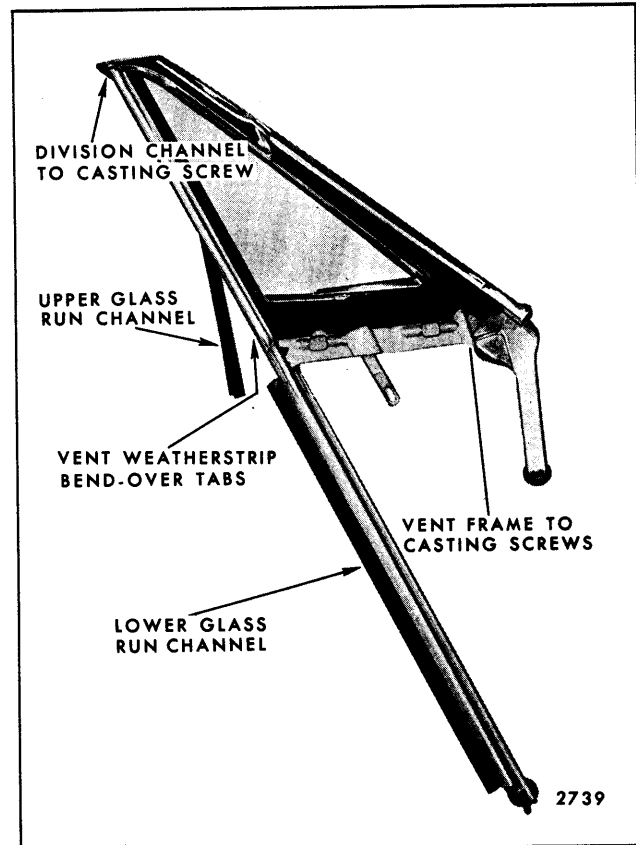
Front Door Ventilator Assembly - "A-39" Styles
